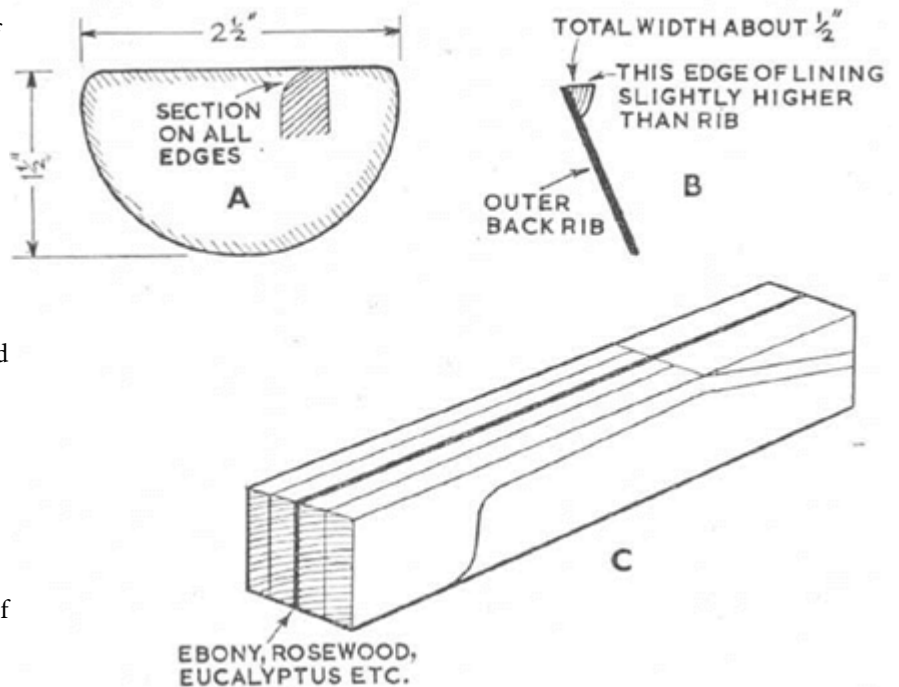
(A) SHOWS DETAILS OF THE INTERNAL TAIL BLOCK,  $\frac{3}{8}$  IN. THICK. A sectional view at (B) gives the final shape of the side linings, whilst (C) shows a laminated neck marked out ready for shaping.
